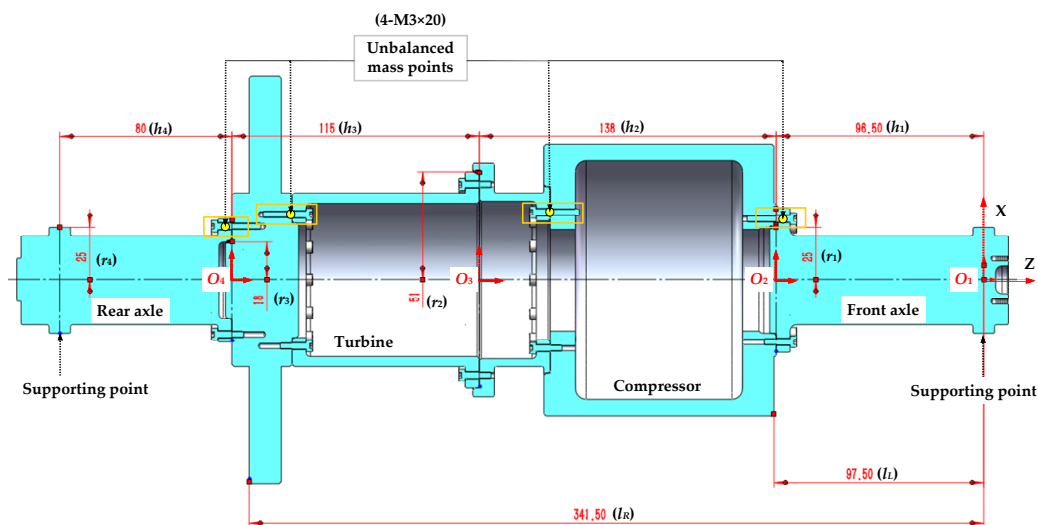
The section view of a simplified four-stage high-pressure rotor system of an aero-engine.
